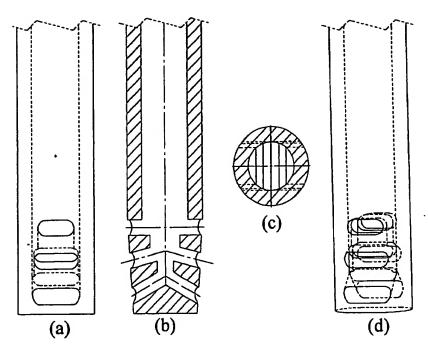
Views of a Second Embodiment of a Casting Nozzle of the Invention
